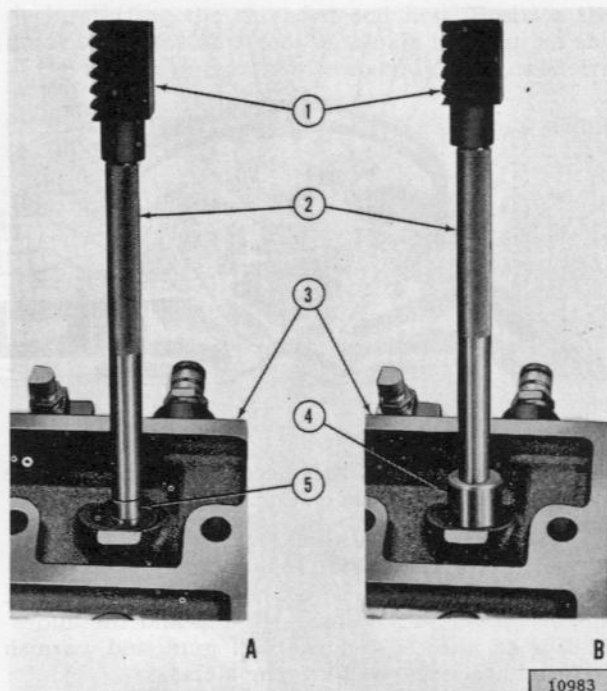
REMOVING AND INSTALLING VALVE GUIDE FROM CYLINDER HEAD WITH TOOL W-265
